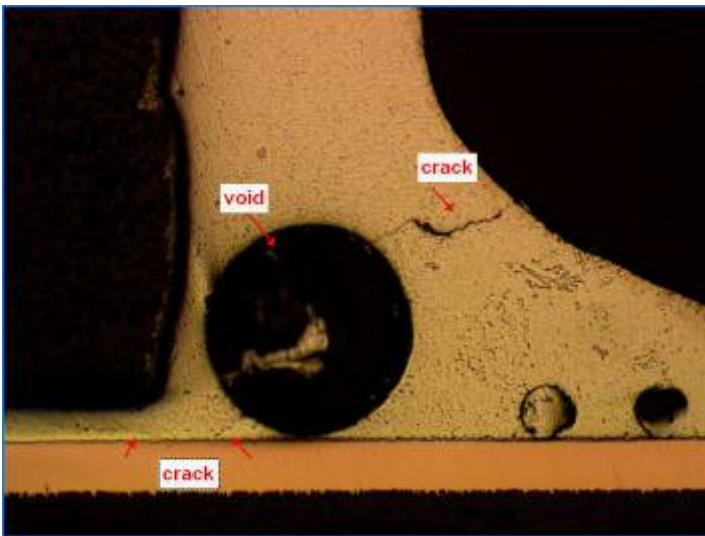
cross section, SN65, U52, right lead solder crack and void, 100x
